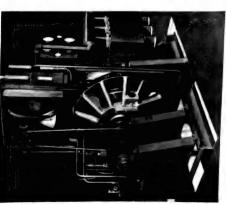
, Clark compressor and intercooler, 120 seim, 3,000 psi discharge.
